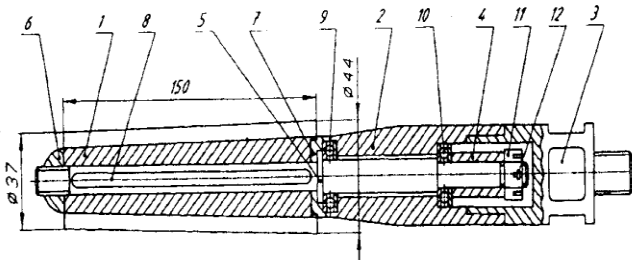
The design of the foreign cleaning device: 1 - conical mill; 2 - housing; 3 - shank; 4 - bushing; 5 - axis; 6 - screw; 7 - ring; 8 - key; 9 and 10 - bearings; 11 - screw; 12 - pin
